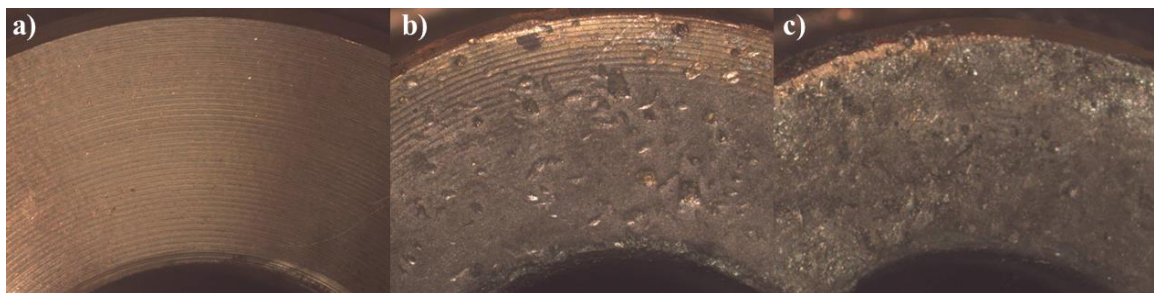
Electrode's Wear Study: Bottom Electrode Macrographs: a) 0 welds; b) 2500 welds; c) 5000 welds.
